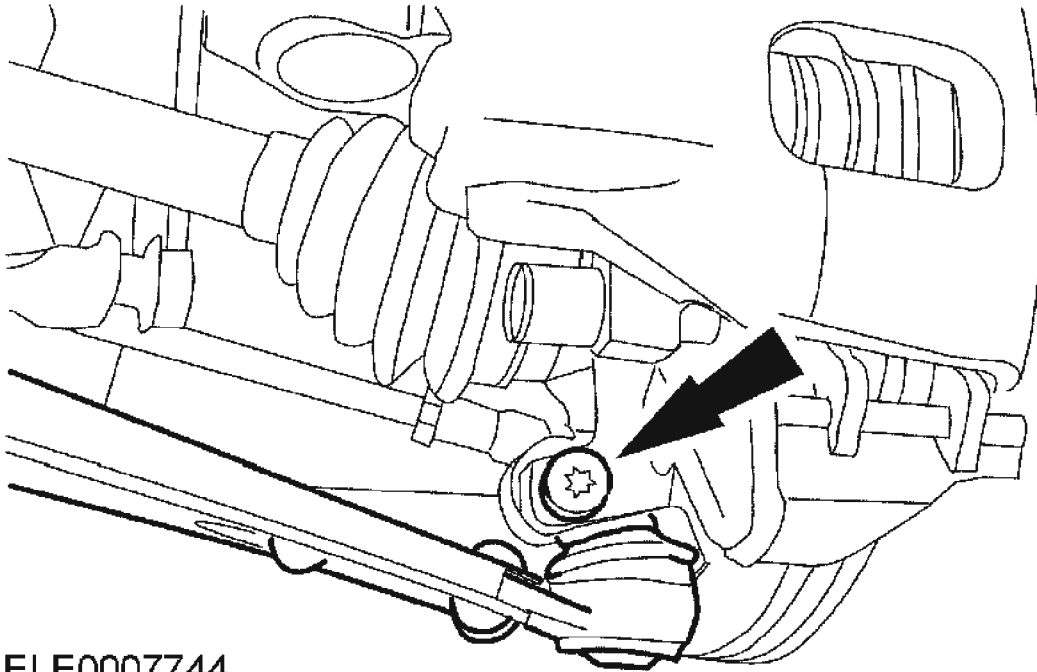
Detaching Lower Arm From Wheel Knuckle
